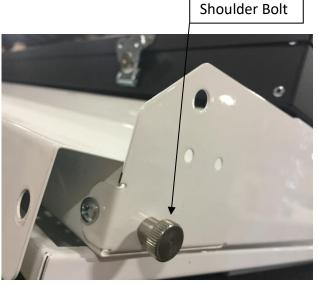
Installing the Shoulder Bolt into the Slider Joint
